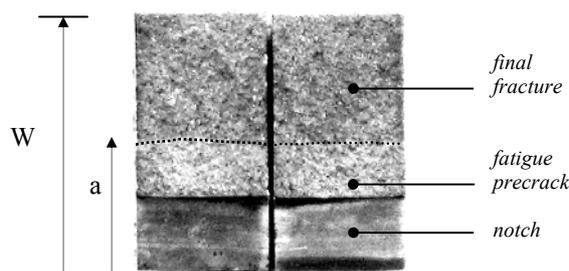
Fracture surface showing a nearly straight precrack front; a crack length; W specimen height.
